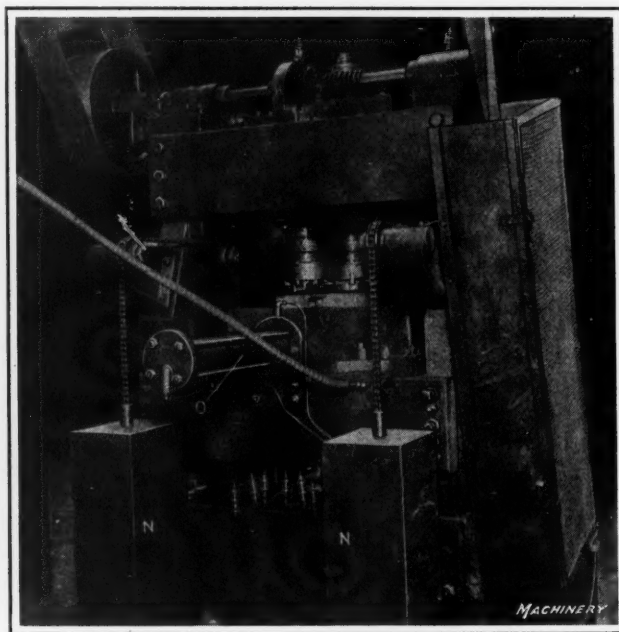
Rear View of Machine showing Table Counterweights and Air Cylinder for Manipulation of Work-holding Fixtures
